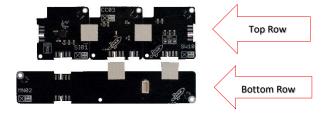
Recommended way to assemble the bottom layer is to first assemble the top and bottom row separately.
